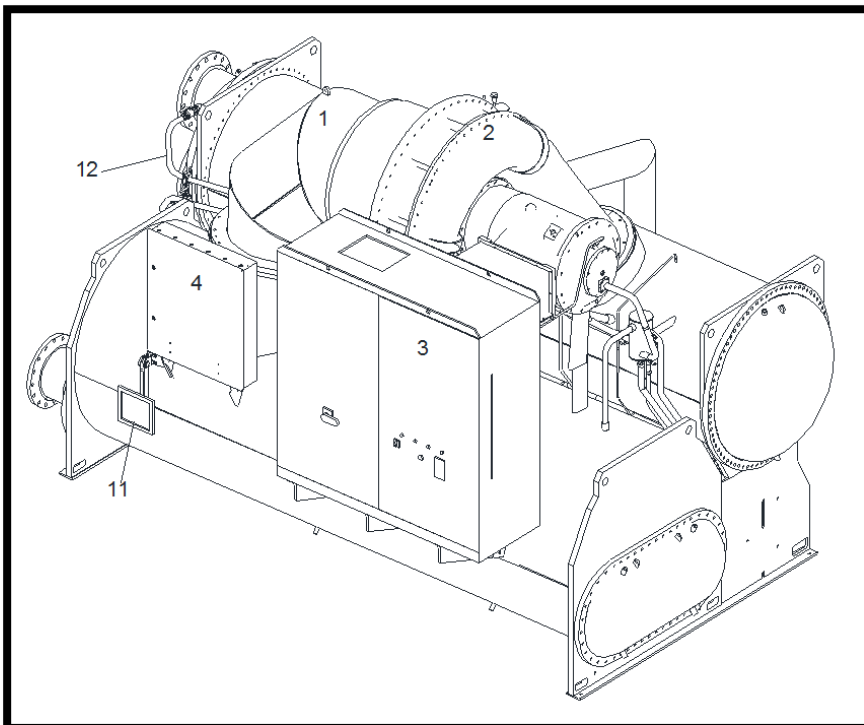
Front View of Condenser Left Side Outlet Cooling System
